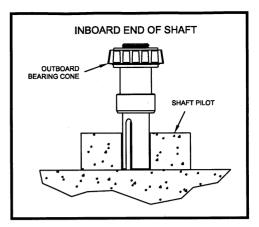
Placing Outboard Bearing Cone onto Shaft
